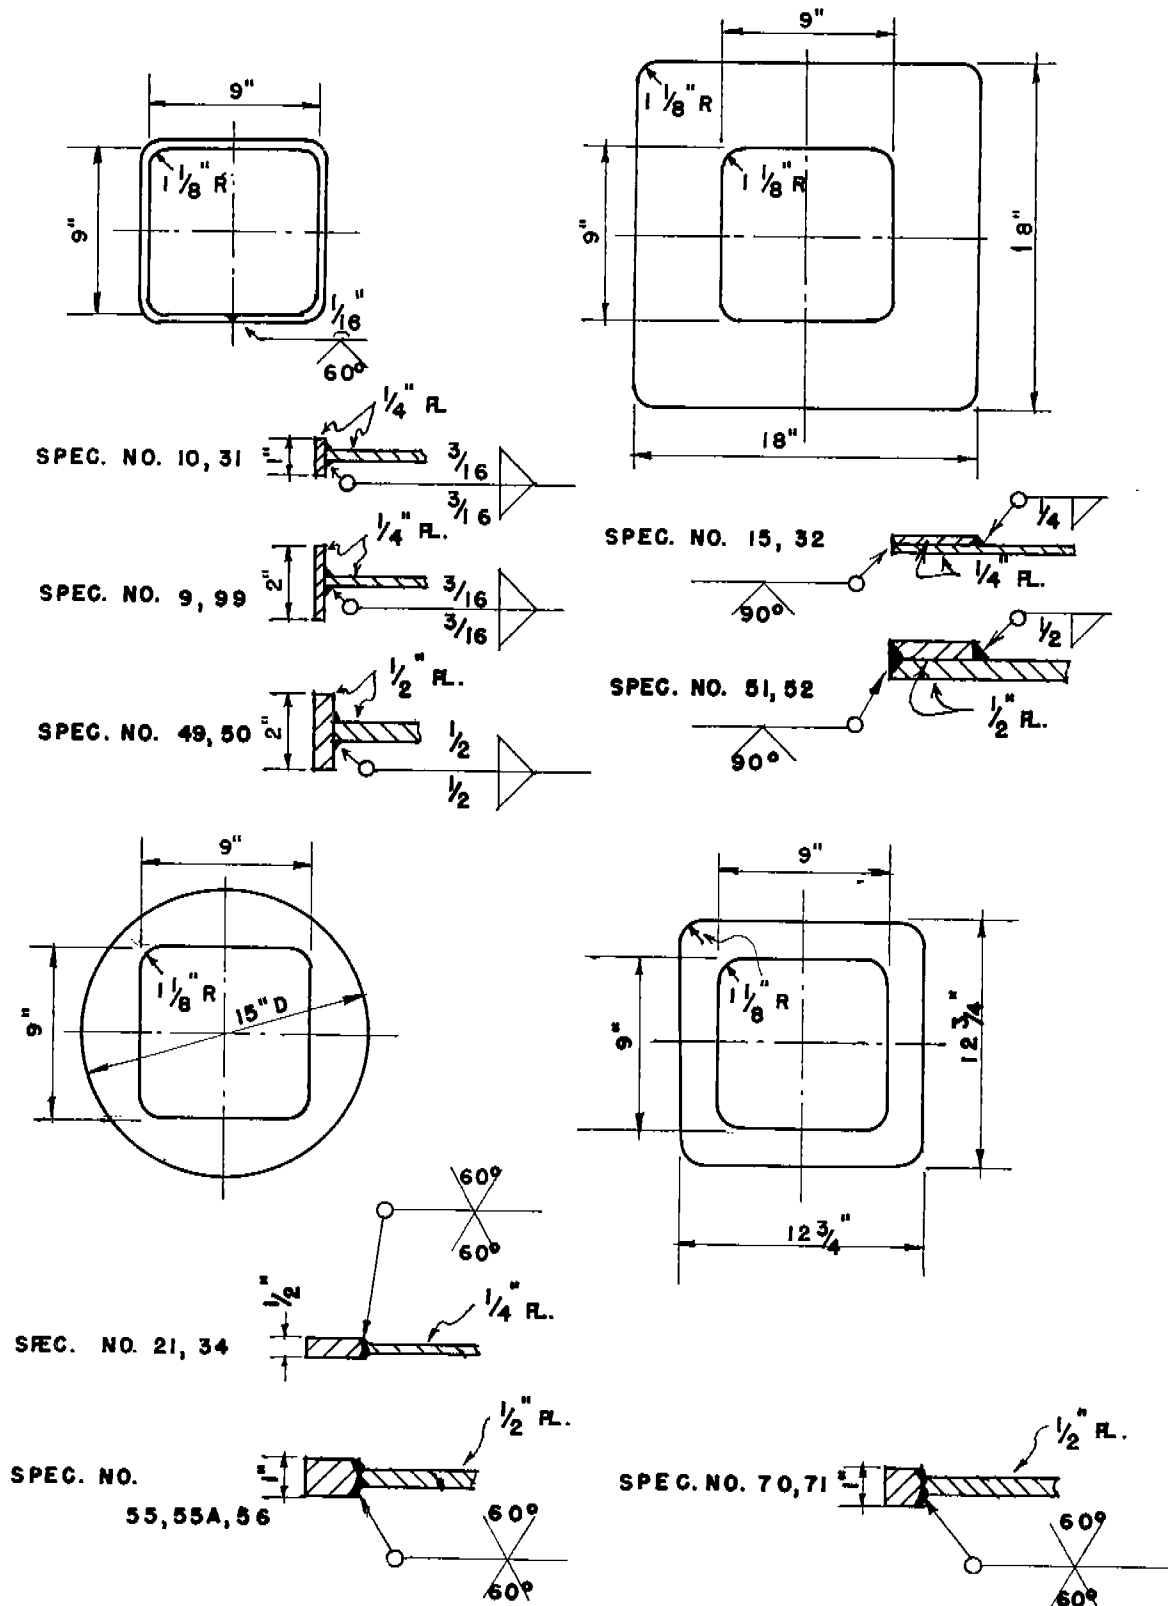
Details of the Face Bar, Doubler Plate and Insert Plate Types of Reinforcement,
